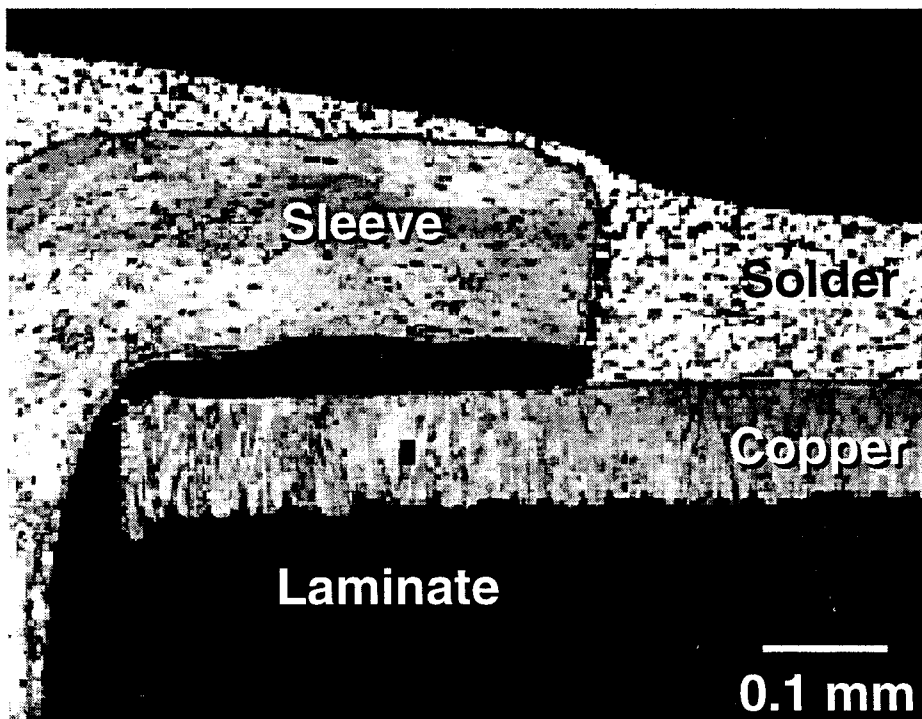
A second quadrant showing partial cracking of the sleeve-to-conductor surface solder joint.
